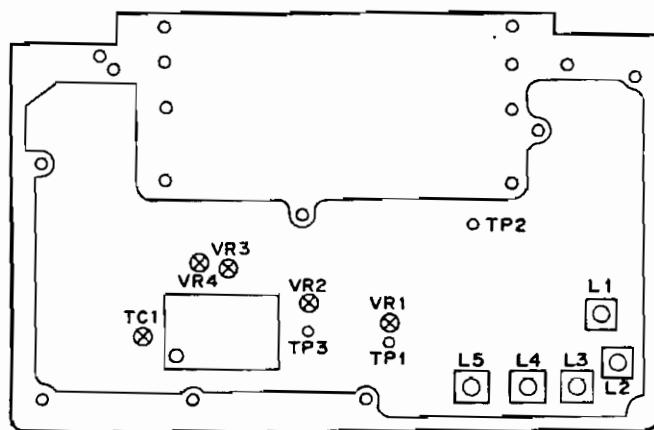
28 MHz Band adjustment: Component layout (upper view)
